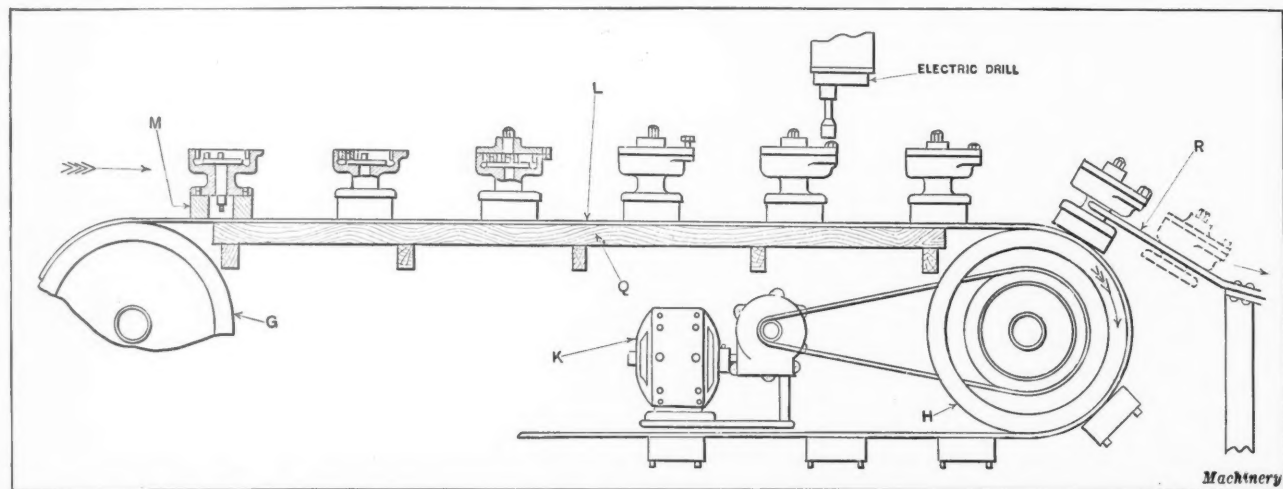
Motor-driven Belt Conveyor used in assembling the Triple Gear Unit shown in Fig. 5
